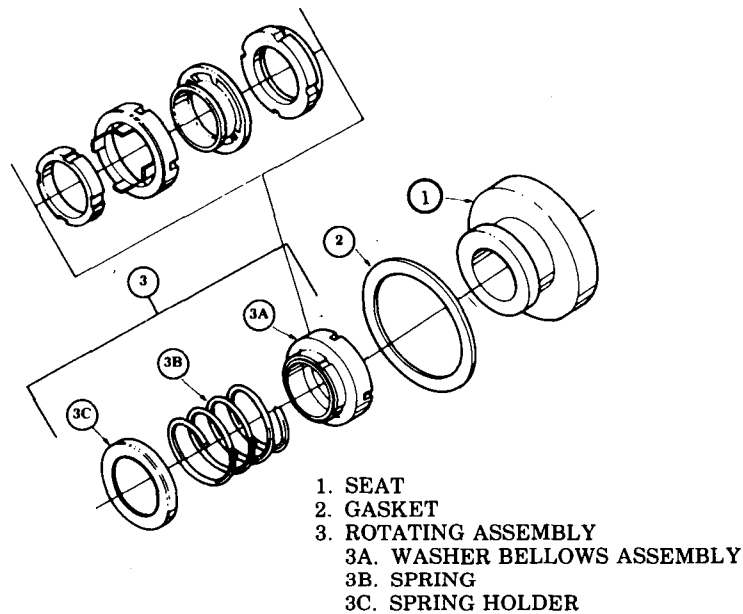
Crane Type 21 Mechanical Seal – Clamped Seat
